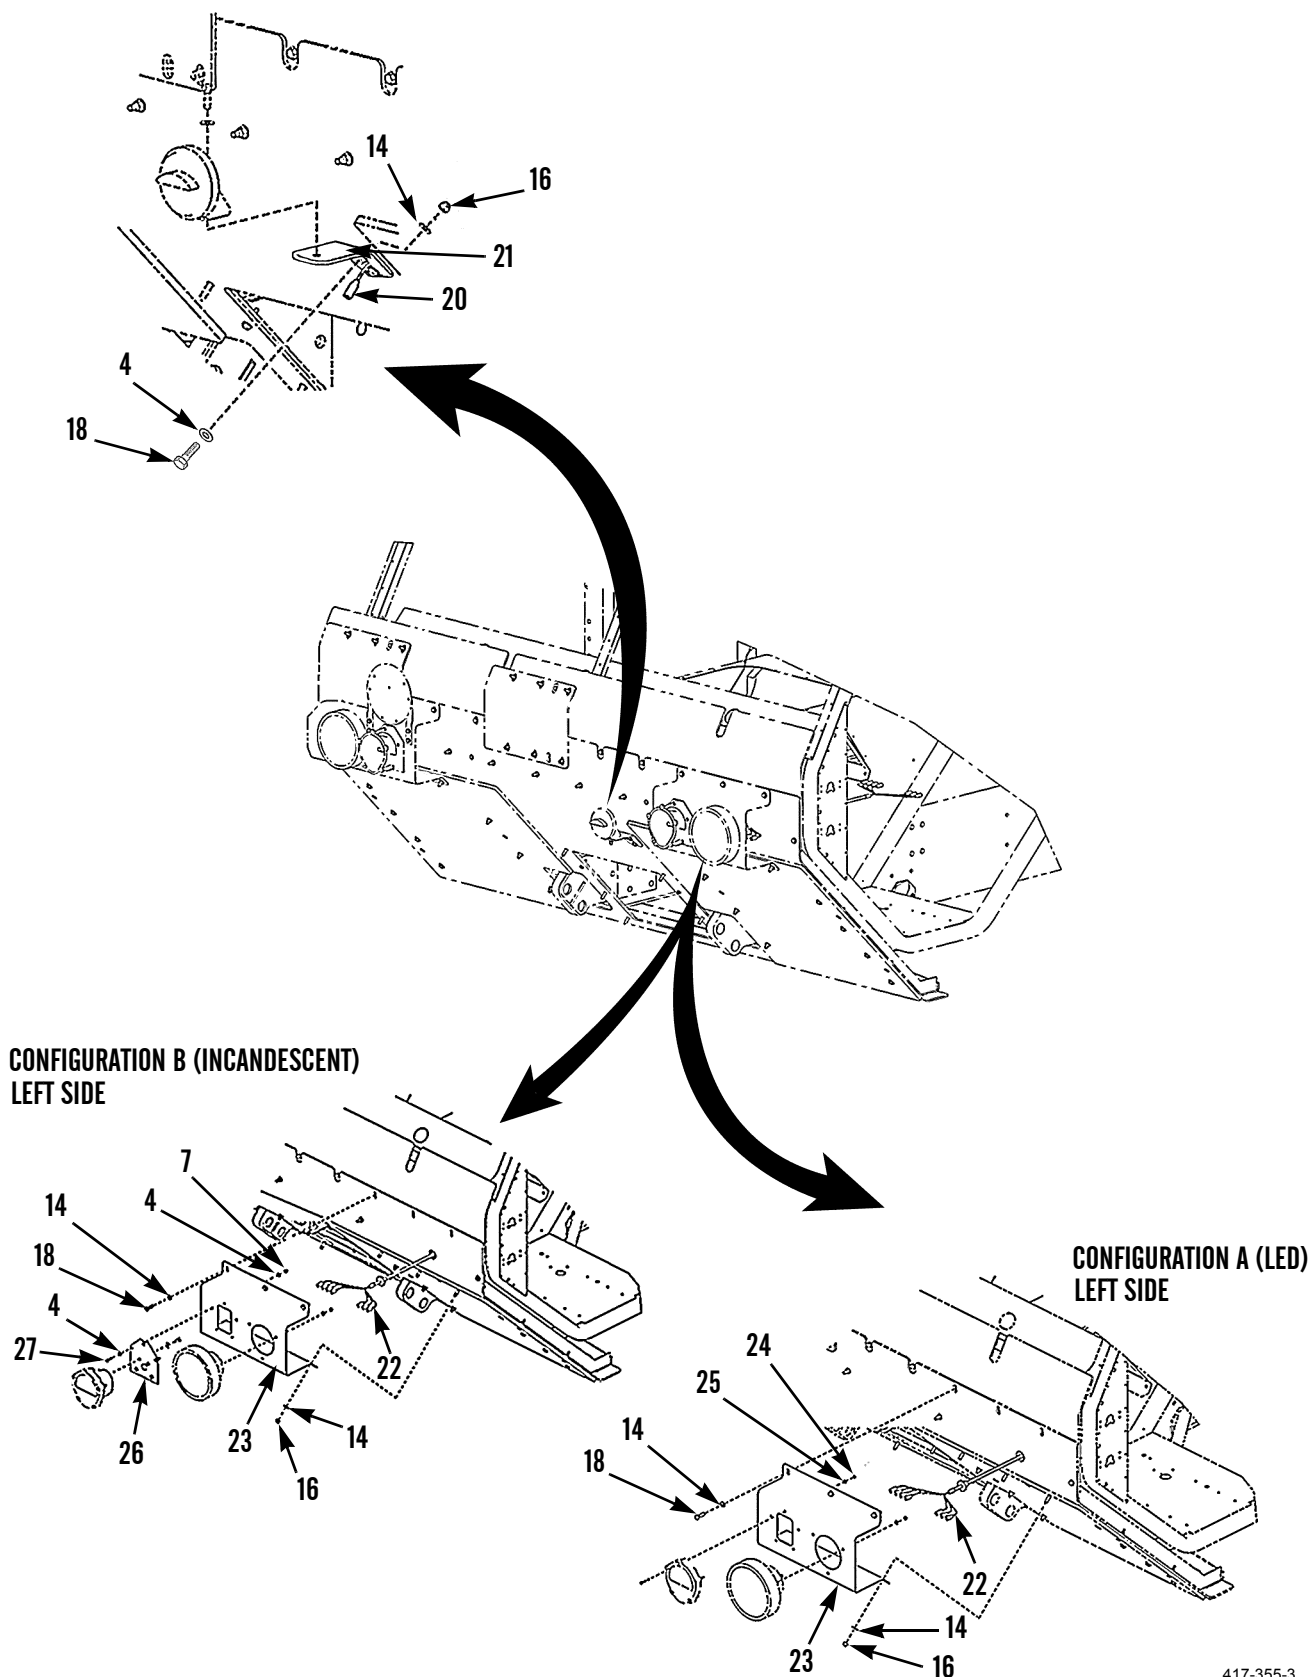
Front Armor Kit and Mounting Hardware (Sheet 3 of 4)
